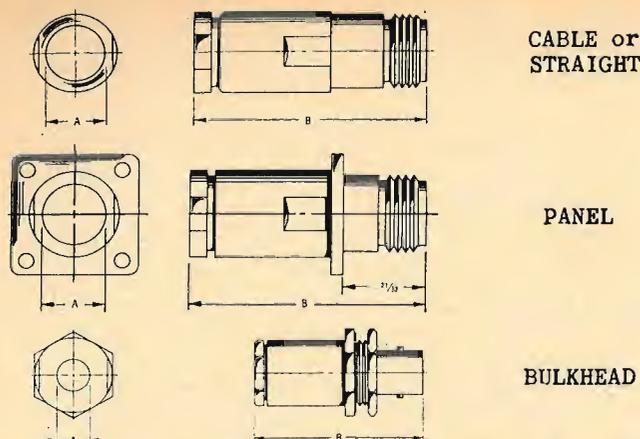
Jacks tie cables to each other or to panels. Dimension A is the cable o.d.; Dimension B is jack length.
